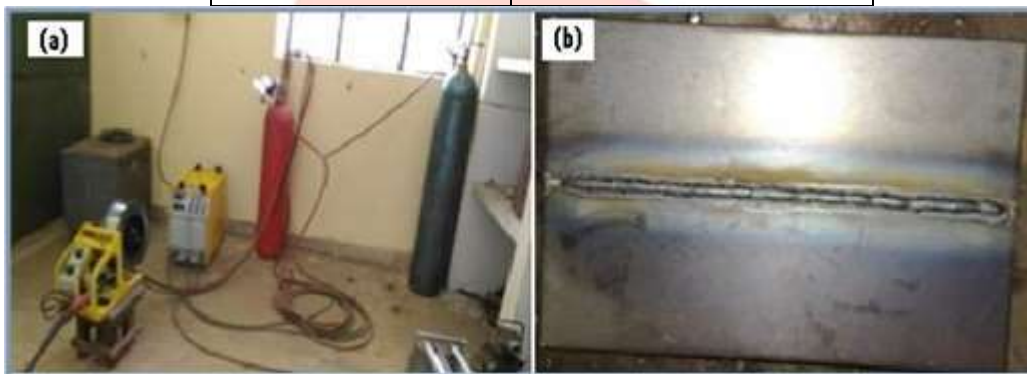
(a). MIG welding setup, (b). Welded component.
